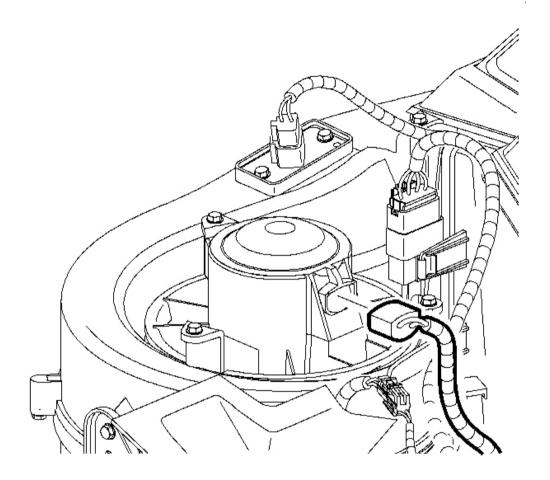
Blower Motor Screws & Blower Case Assembly Courtesy of GENERAL MOTORS CORP.
